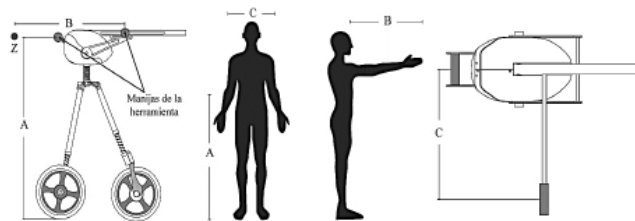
New Oil Palm Cutting Tool (Parra et al., 2018)
